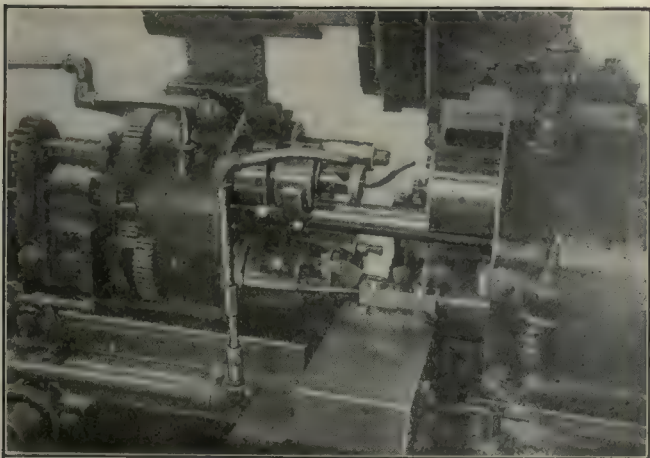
MACHINING BOWL CAPS ON AUTOMATIC
